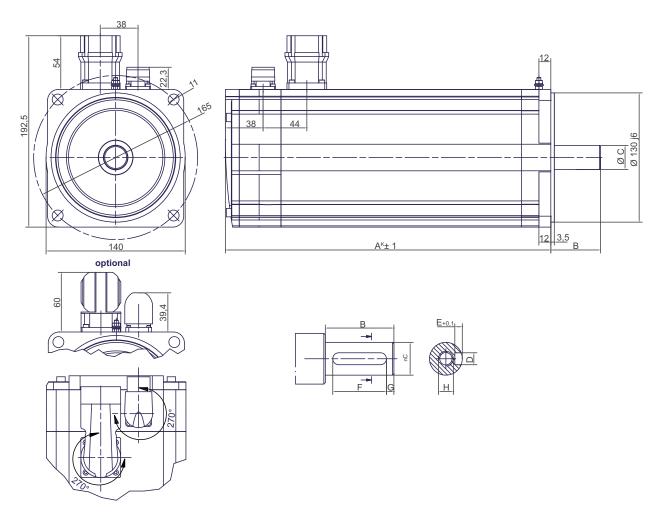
Dimensional drawing for BSH-140 2 (T); BSH-140 4 (P)
